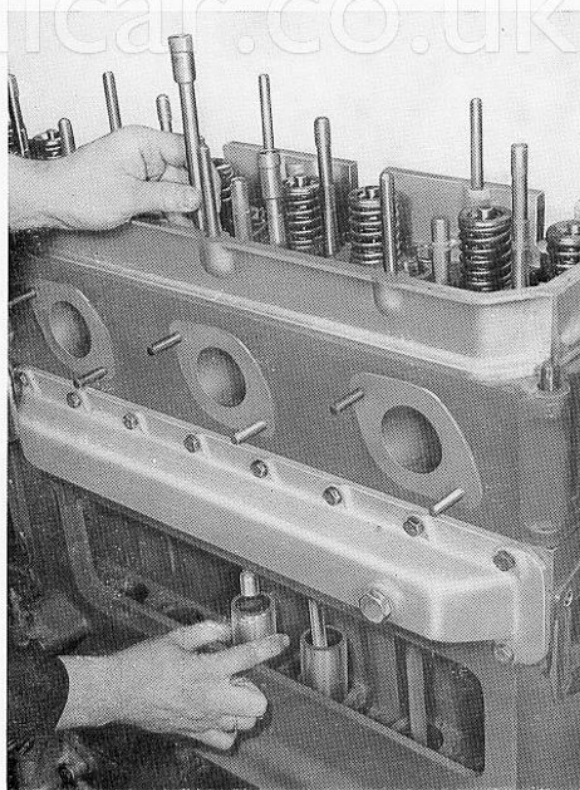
REMOVING PUSH RODS AND CAM FOLLOWERS
